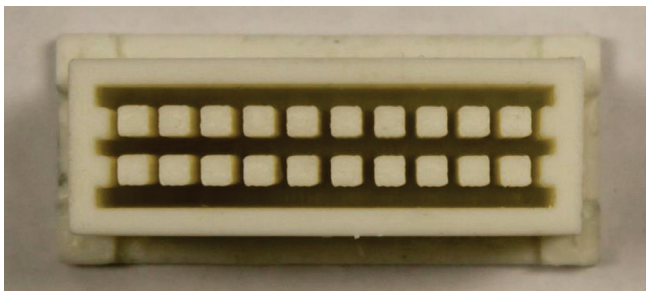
Top view of assembled mold whose two individual components are shown in Fig. S1.
